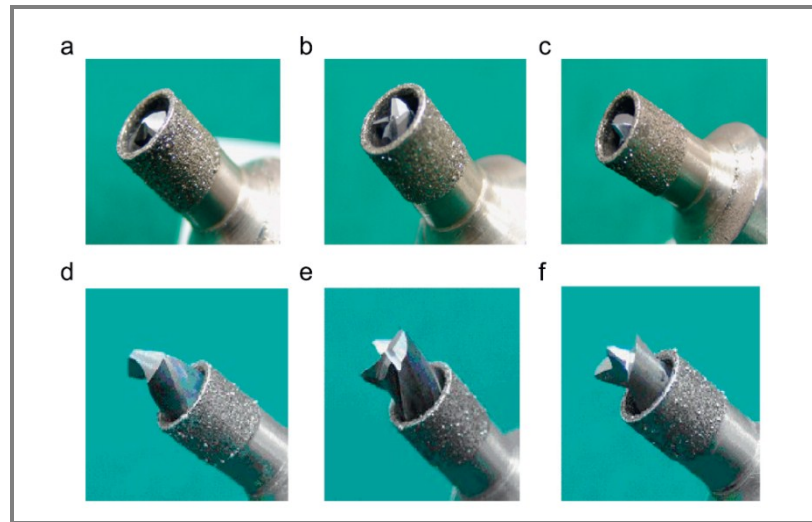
Photographs of various types of the compound core-special drills: a) Core-twist drill, b) core-saw drill, c) core-candlestick drill, d) step-core-twist drill, e) step-core-saw drill, f) step-core-candlestick drill. [84]
